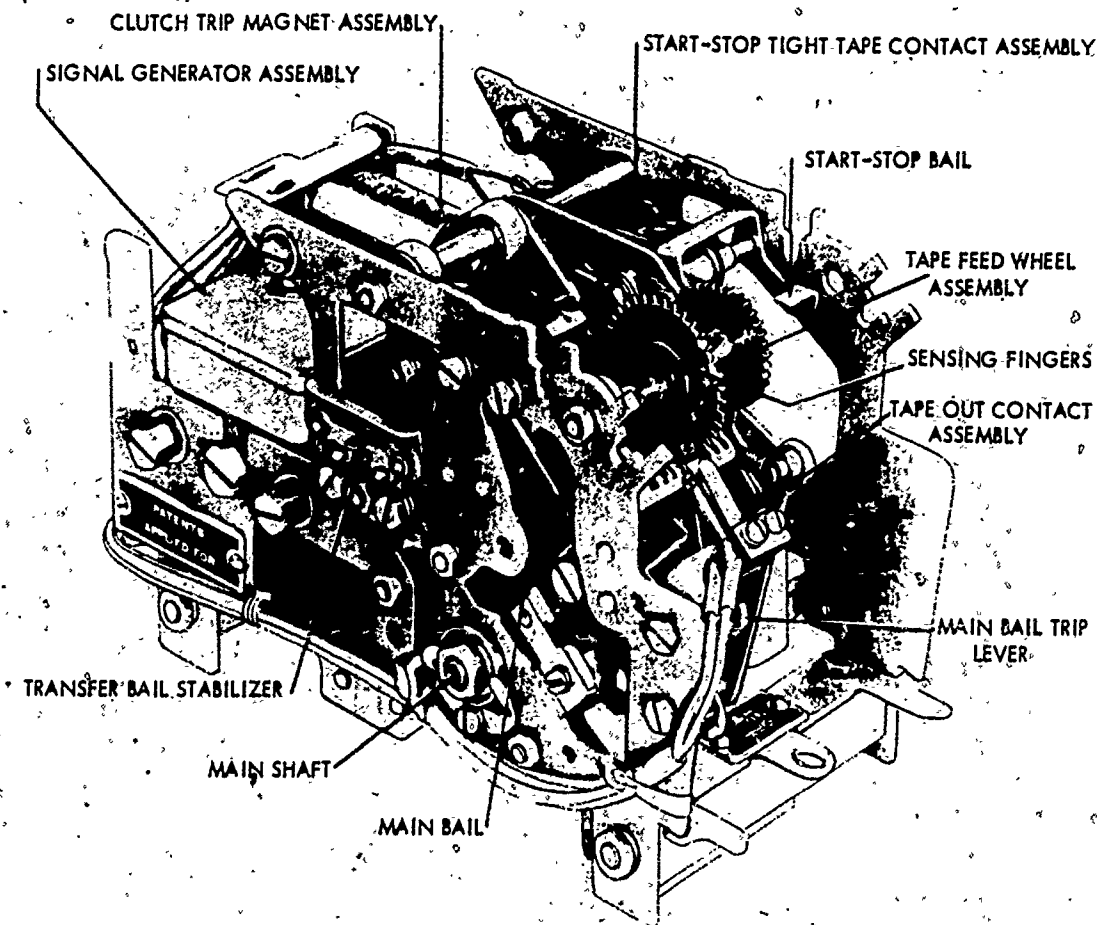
Transmitter distributor (cover plate, top plate and tape guide plate removed).
